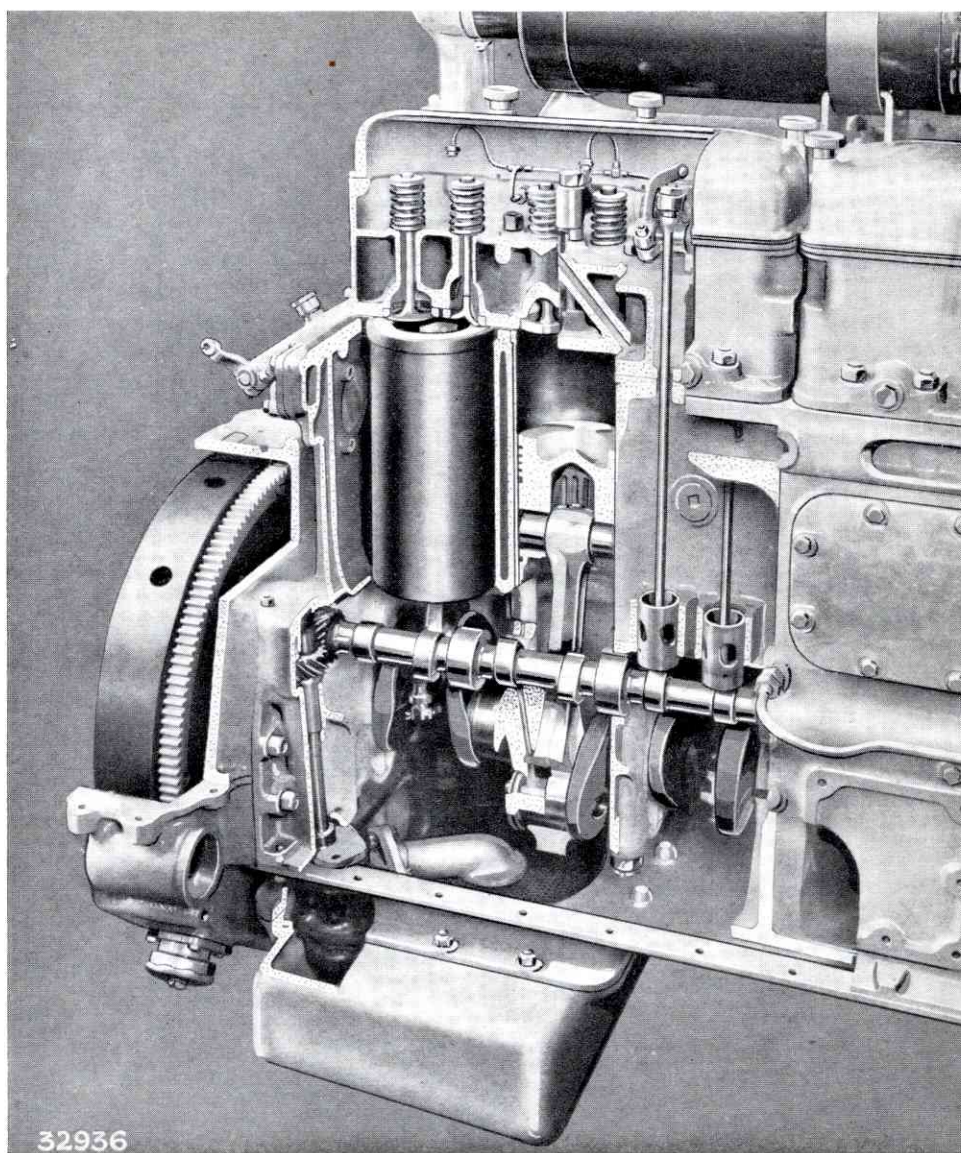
TYPICAL CUT-AWAY SECTION OF REAR OF ENGINE
